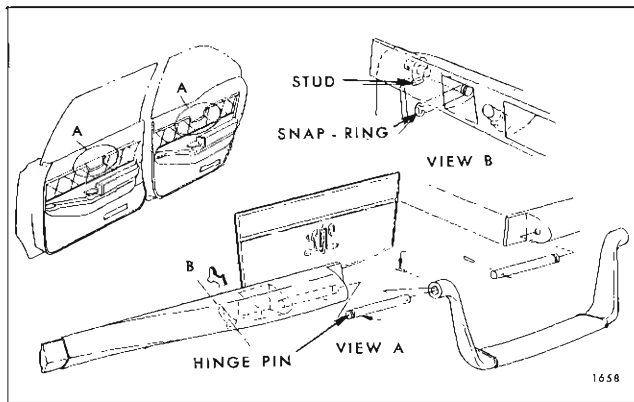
D10—Door Pull Handle Assembly - 38669 Style
